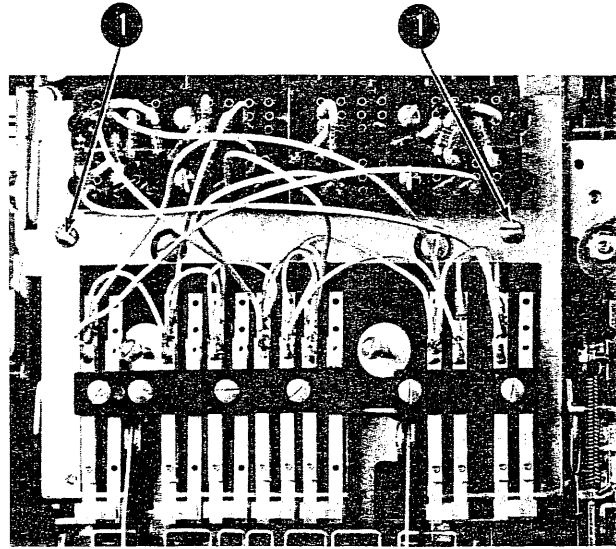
Cycle-Clutch and Cycle-Shaft Removal (Step 7)
